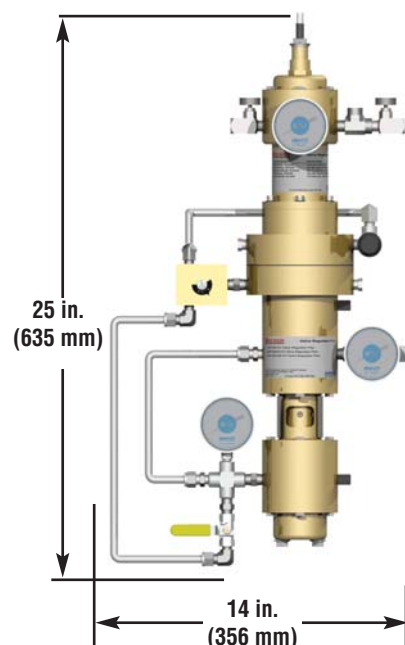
Overall dimensions of Becker Model VRP-600-SB-PID-40 Controller (Direct-Acting)
